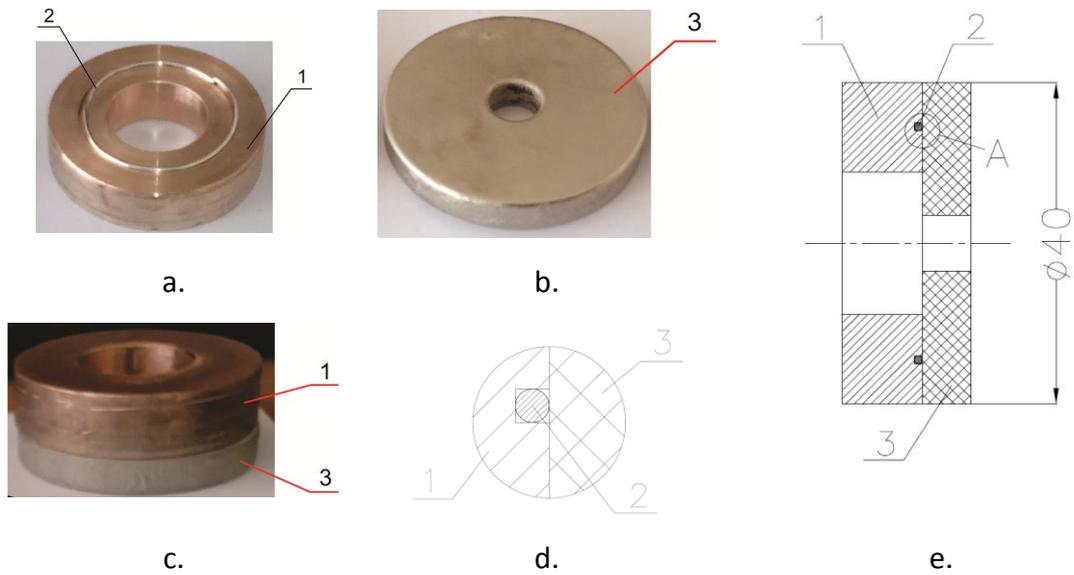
2: The view and assembled scheme of sample 2.
